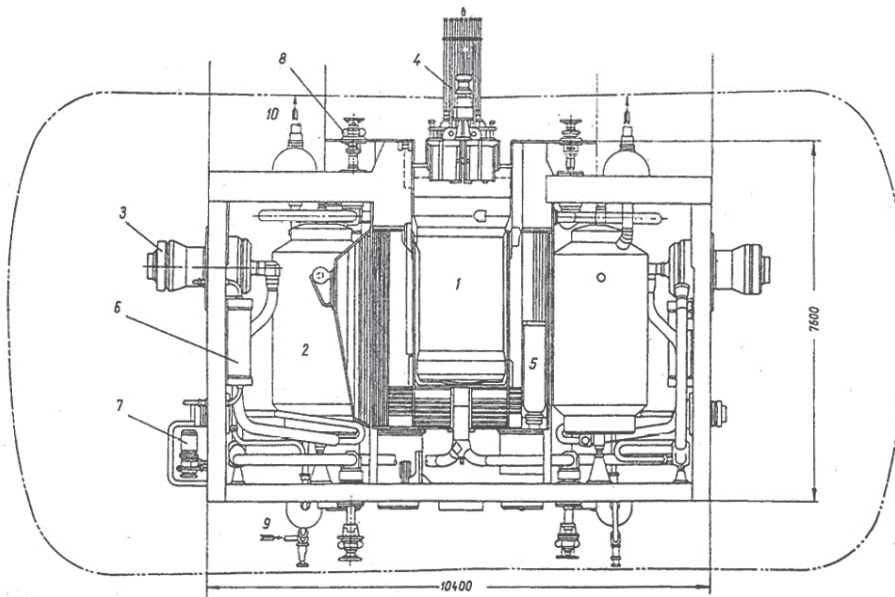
Layout of the OK-150 plant. 1: Reactor, 2: Steam generator, 3: Main circulation pumps, 4: Control rod drives mechanism, 5: Filter, 6: Cooler, 7: Emergency cooling pump, 8: Primary circuit pressure relief valve, 9: Feedwater inlet, 10: Steam outlet (Reistad et. al., 2006).
